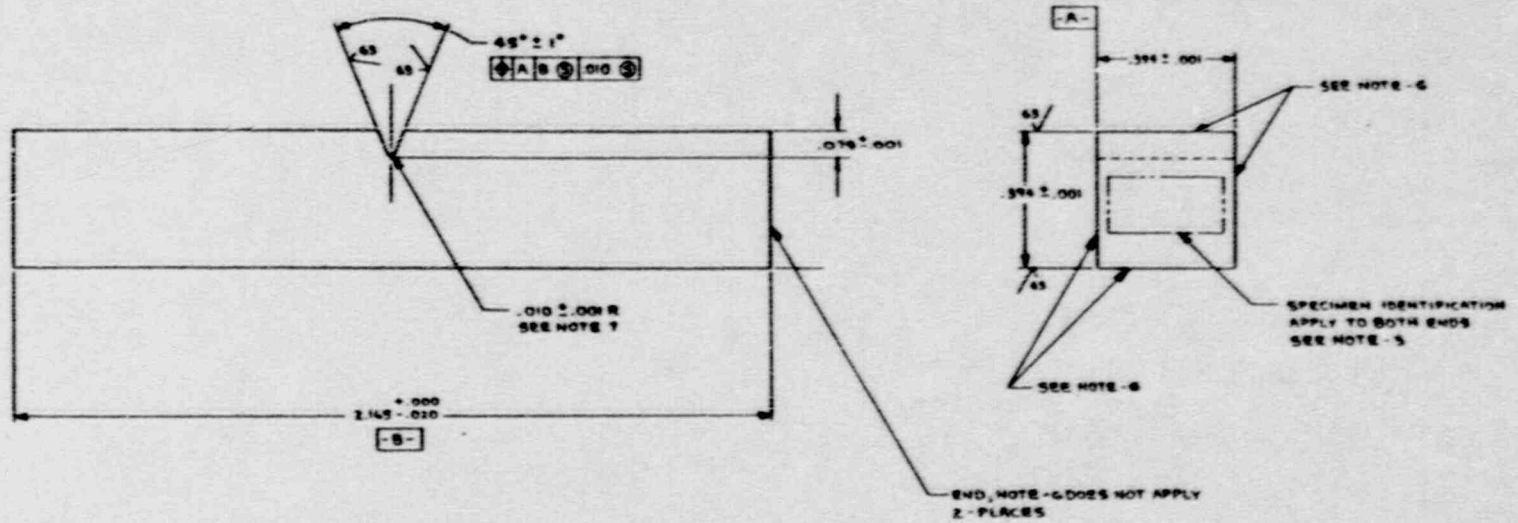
Charpy V-Notch Specimen Used in Westinghouse Plant-Specific Capsules
